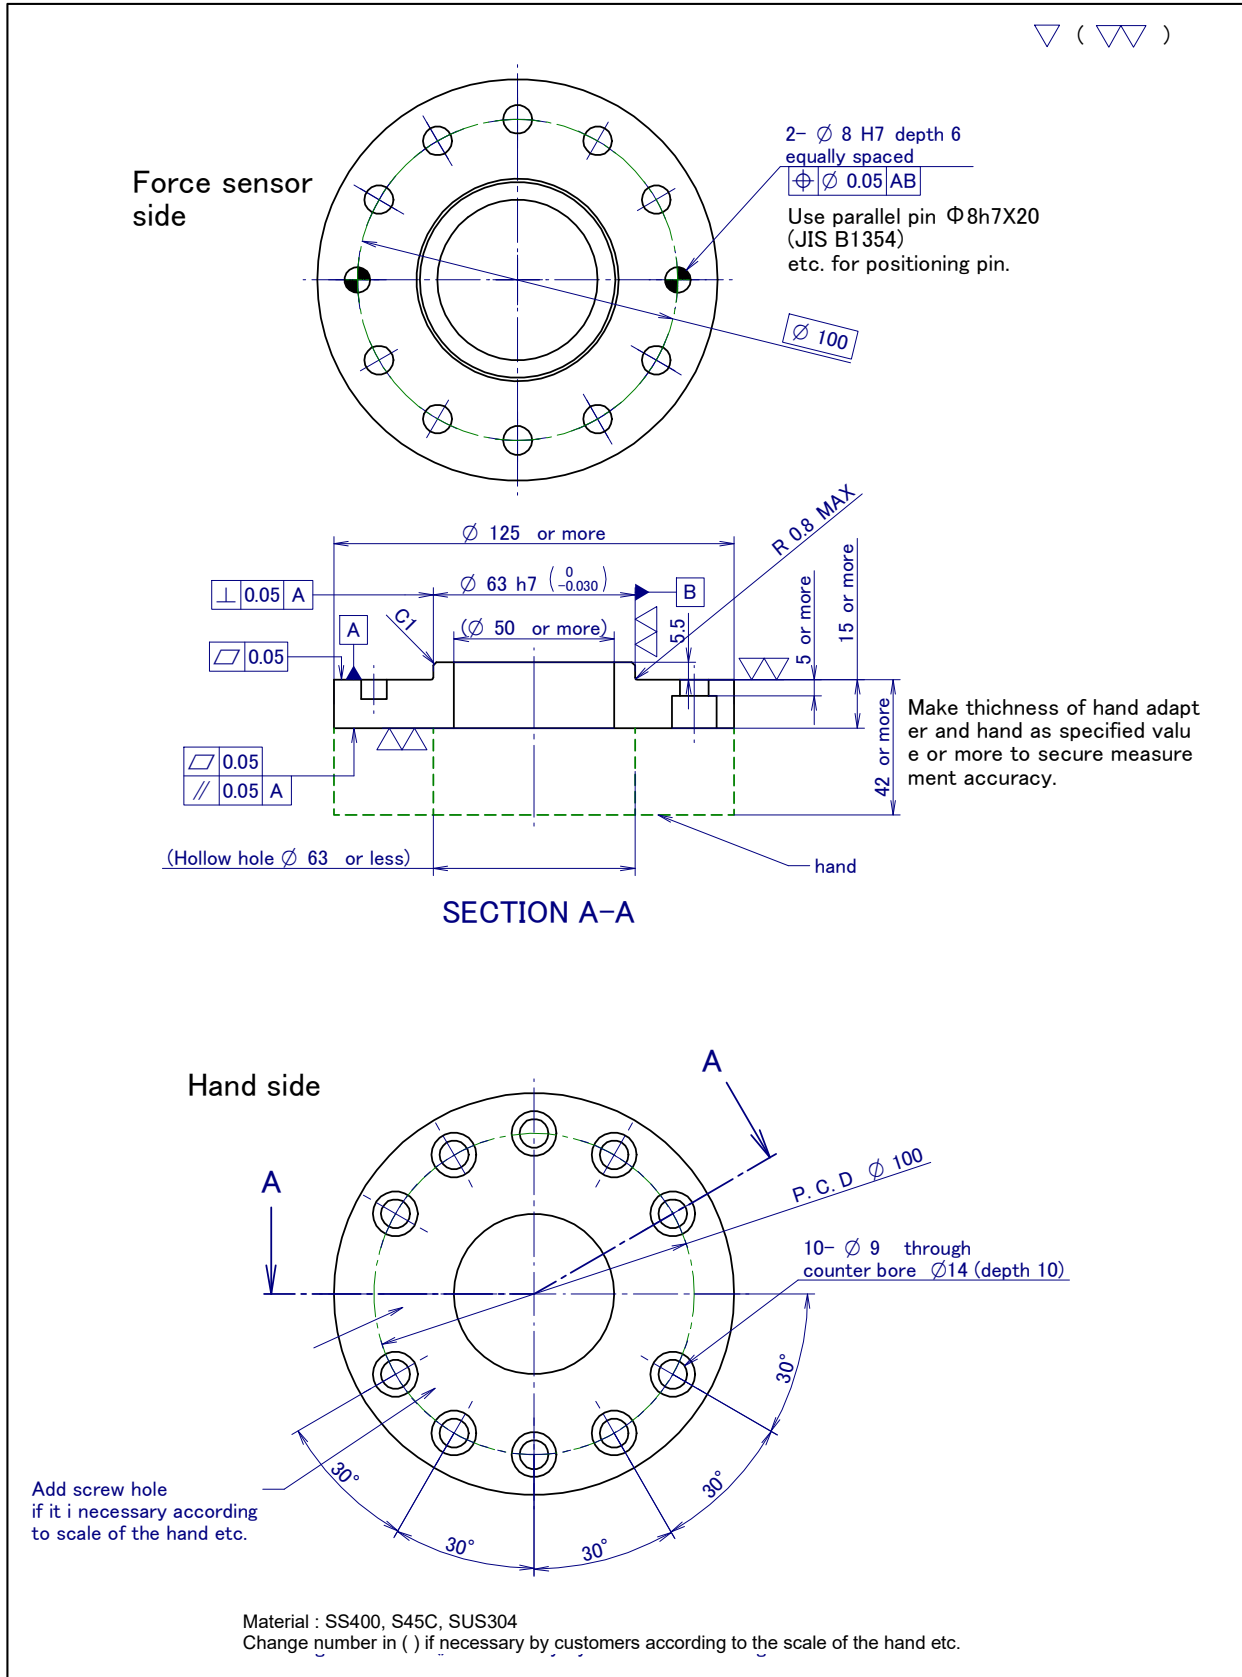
(c) Example of designing the hand mounting adapter (FS-100iA)
